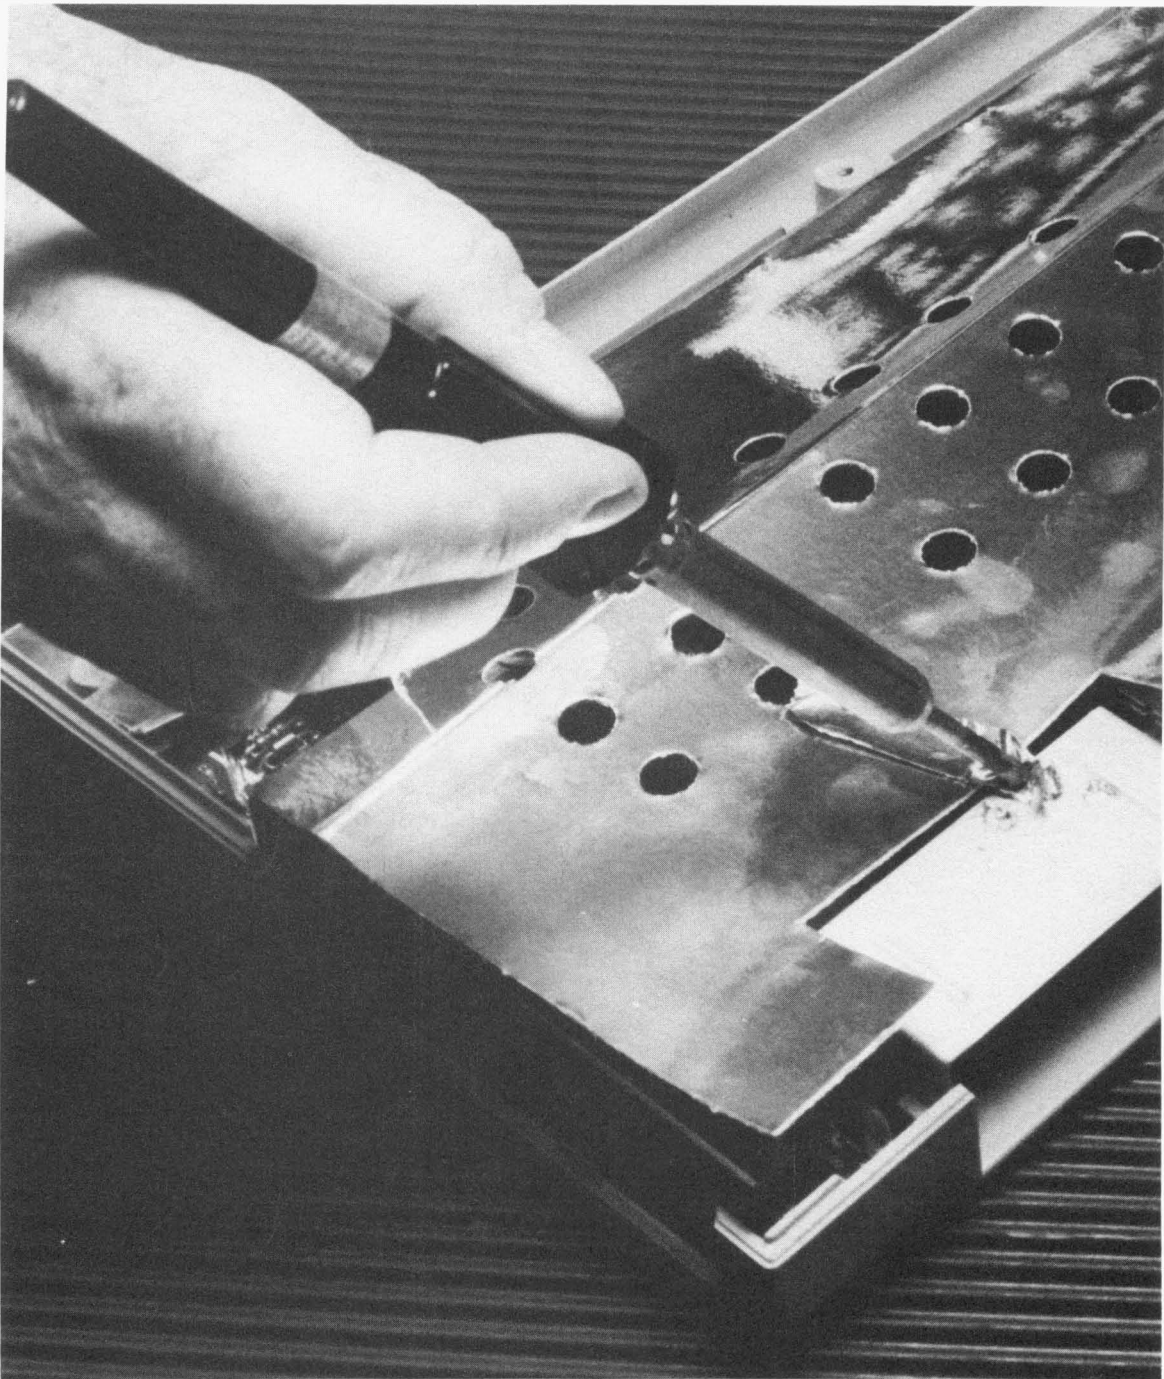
The metallized cardboard covering on the board is soldered to the cover of the rf modulator. It is removed with a low-wattage iron.
